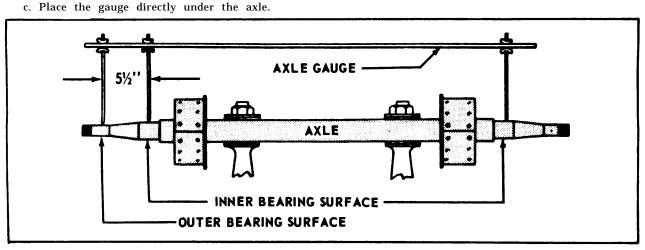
CHECKING FOR AXLE BEND AND CAMBER.
